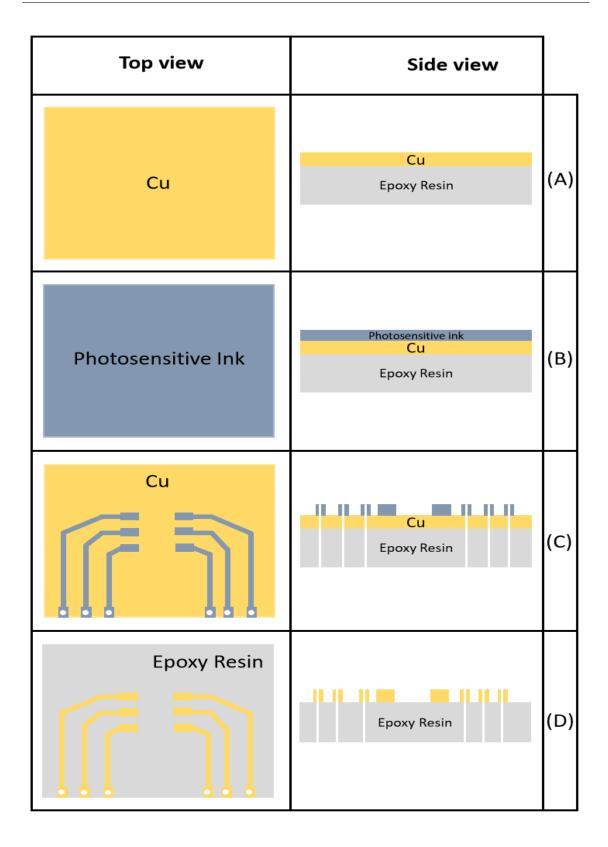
Top and side view of the fabrication methods. (A)Copper Clad Laminate (CCL). (B) CCL with photosensitive ink. (C)CCL with unnecessary ink removed and drills. (D) Final board with tracks and footprints.
